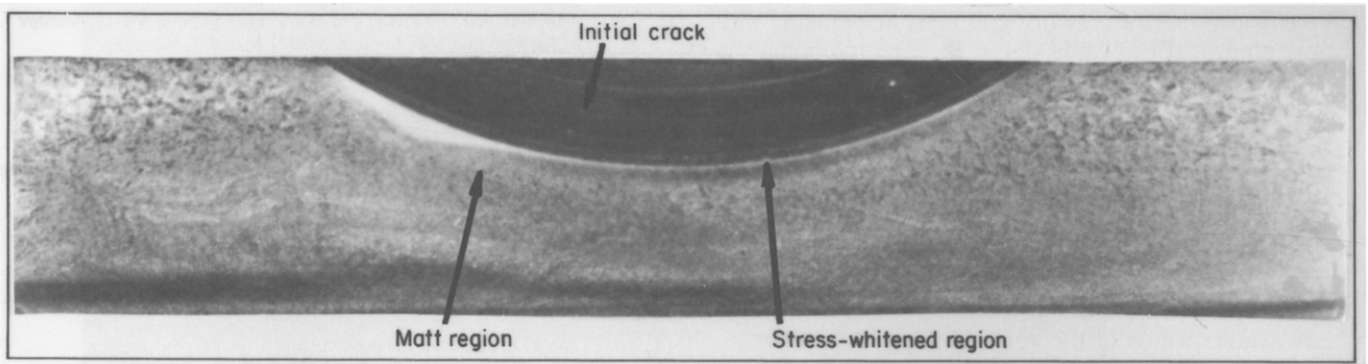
The fracture surface from a SNB specimen (containing a surface crack).
